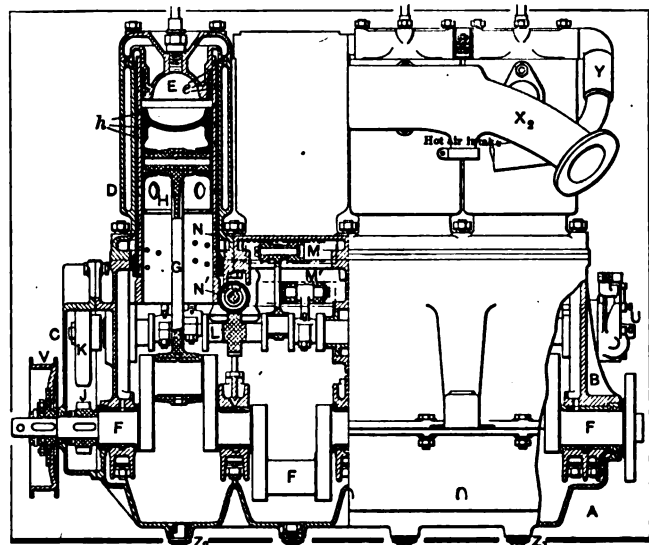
Longitudinal section of the Panhard Knight motor, showing spherical pistons, crankshaft, and half-time shaft and the oil pump U
